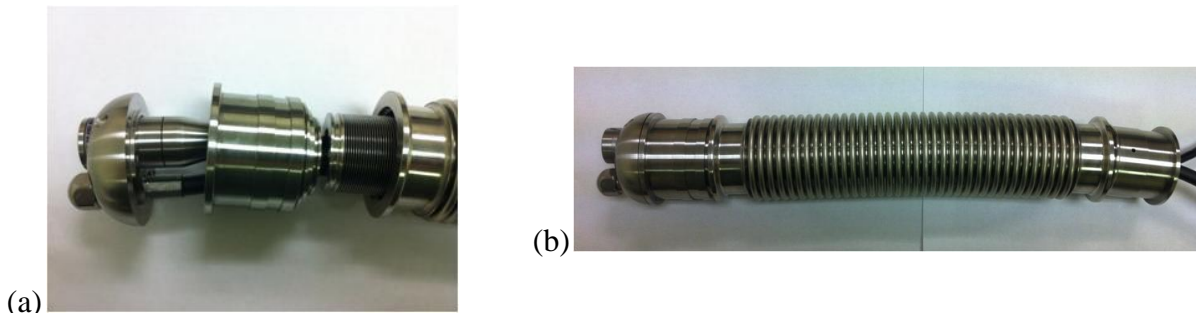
(a) Front assembly of the crawler, (b) side view of crawler.
